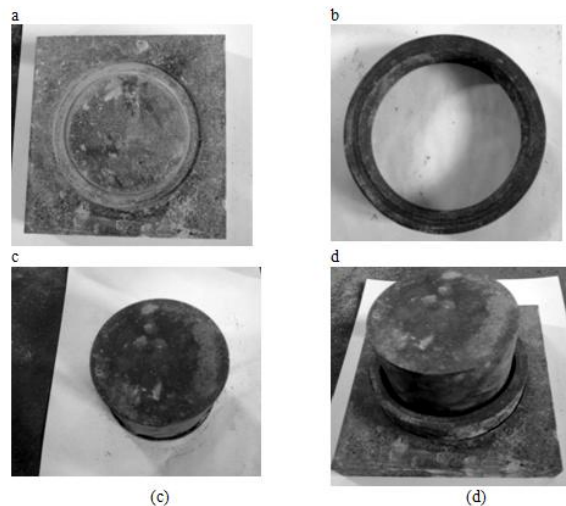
(a) Base part, (b) mould body , (c) ramming press , (d) mould assembly .
